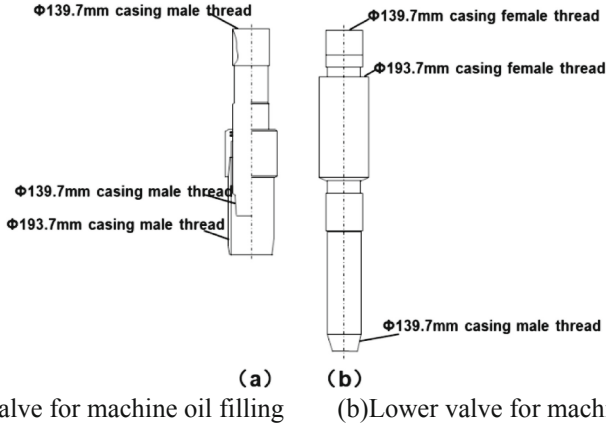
Machine oil injection valve device. (a) Upper valve for machine oil filling. (b) Lower valve for machine oil filling
